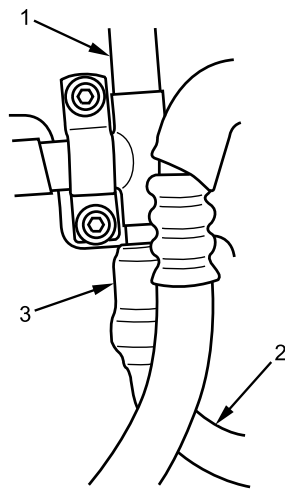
HVAC Compressor Discharge Hose at T-fitting.
